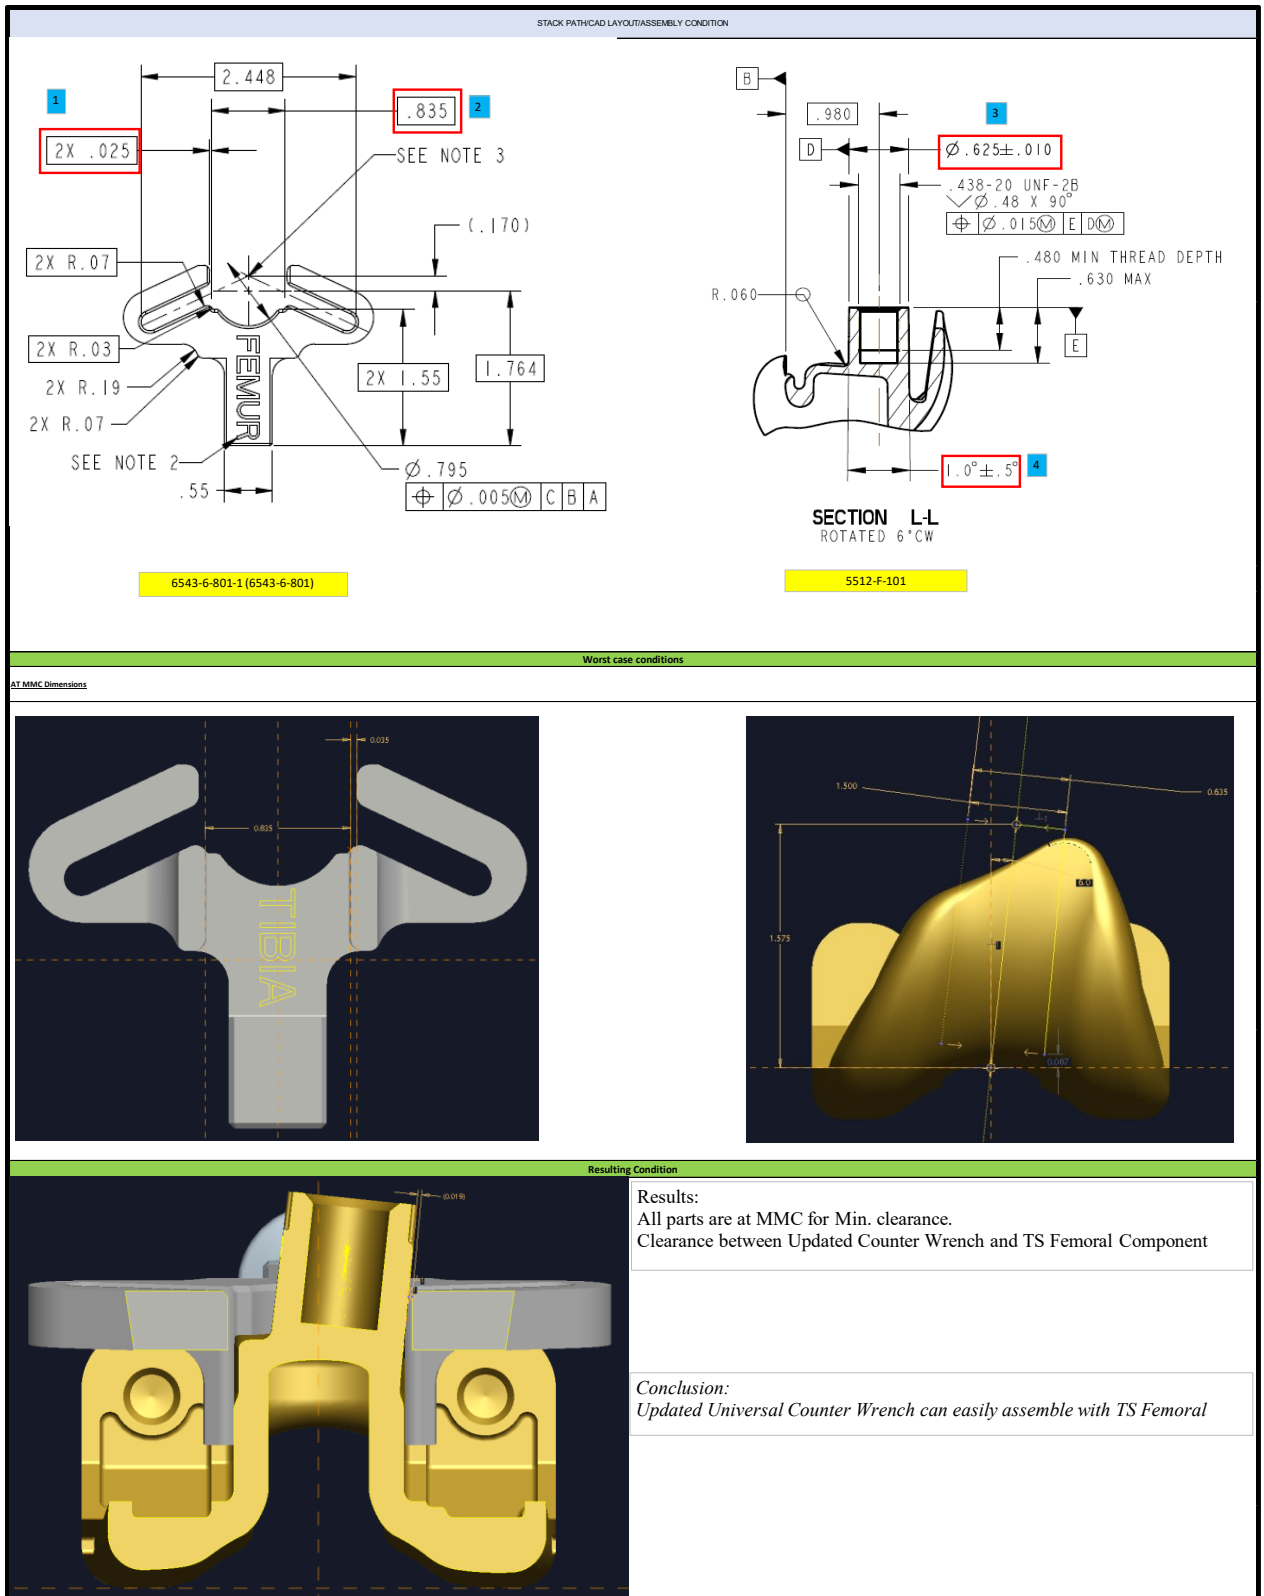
Assembly of Universal Counter Wrench with TS Femoral Component size 8 (Tolerance report T05XXX)
